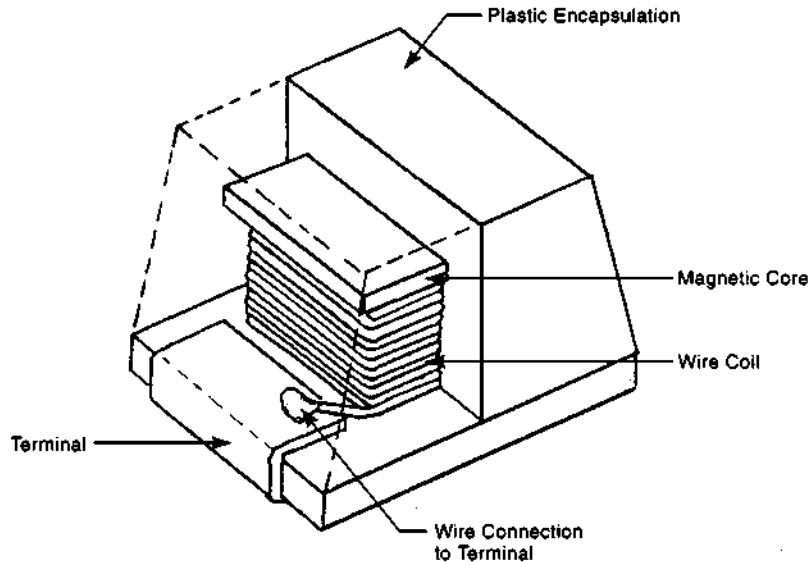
L3 Cut-away view of an inductor suitable for mounting on a surface-mount-type printed circuit board.
